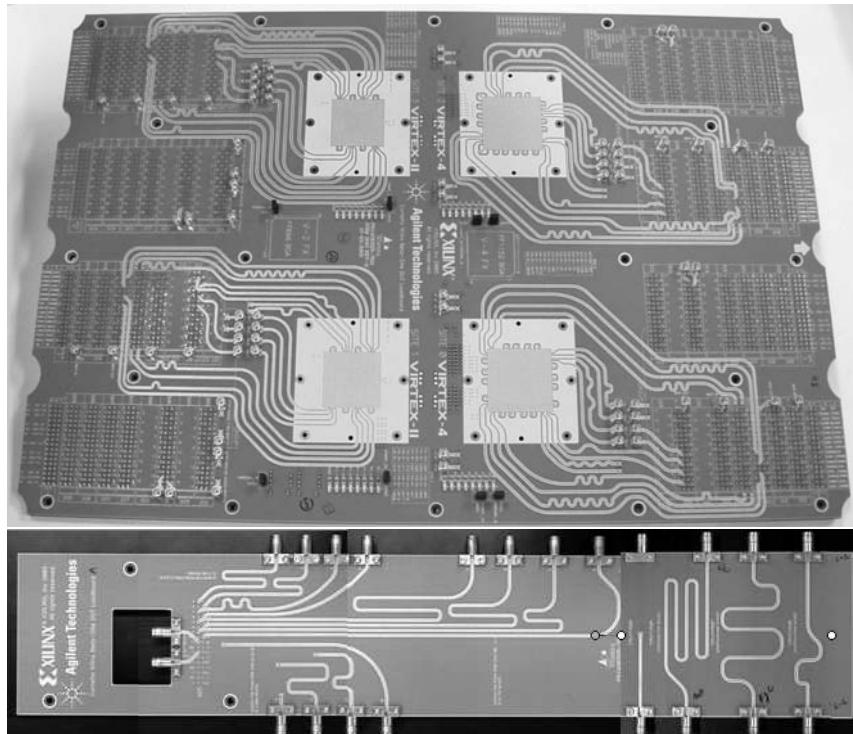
Example of a test fixture (top) and its corresponding test coupon (bottom) (courtesy of Verigy).
